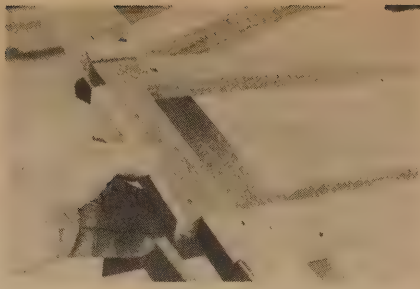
SHORT PIECES of  $\frac{3}{4}\times 2$  are cut to fit between the ends of the horizontal ribs in the lattice. They also provide an even surface for attaching the reflector screen. Brass screws hold each piece in place.
